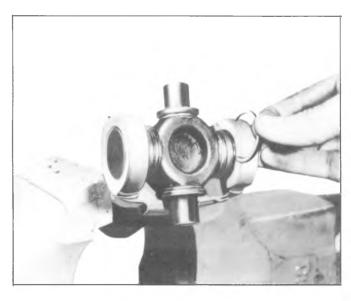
A-16--Installing Snap Ring to Retain Trunnion
